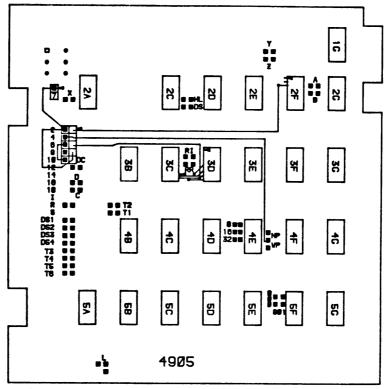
Wire harness and plug location for Shugart Drive used in a 4905. (118-0358-02)
